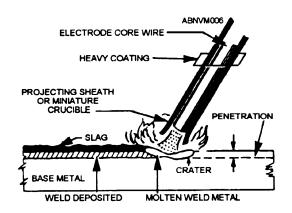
Welding with a heavy coated electrode.
